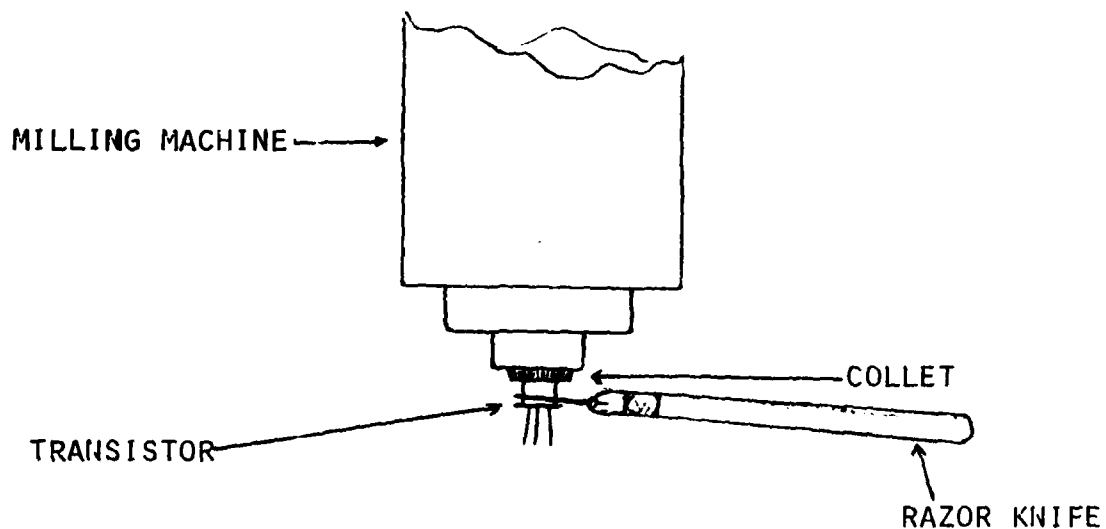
Method of cutting open transistor case. With the case held in a rotating milling machine or lathe collet, a razor knife is used to cut open and separate the outer case cover.
